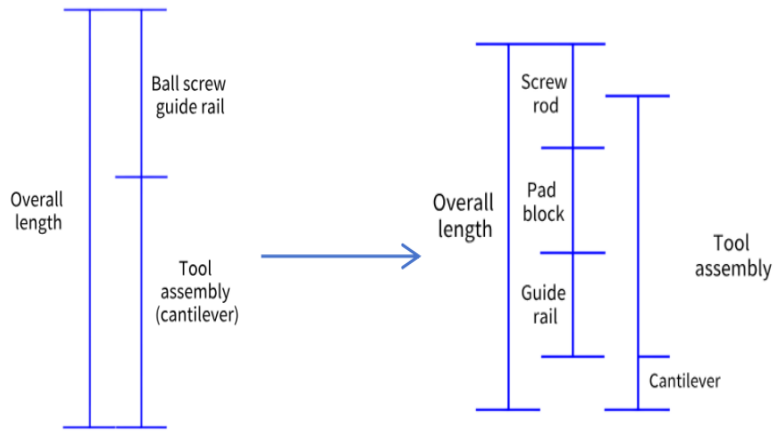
Design Principle of the "Riding" Structure of the Forming Tool.
